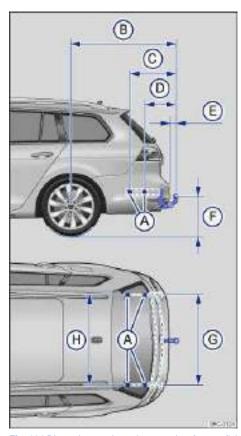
Dimensions and attachment points for retrofitting a trailer hitch.
